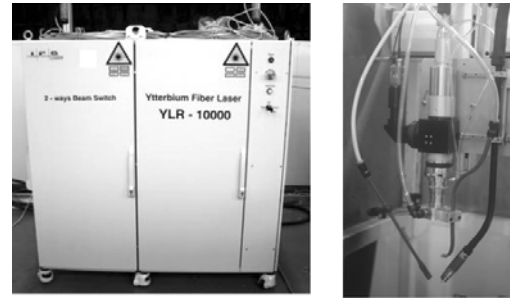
10kW Fiber laser source (YLR10000) and hybrid torch head
